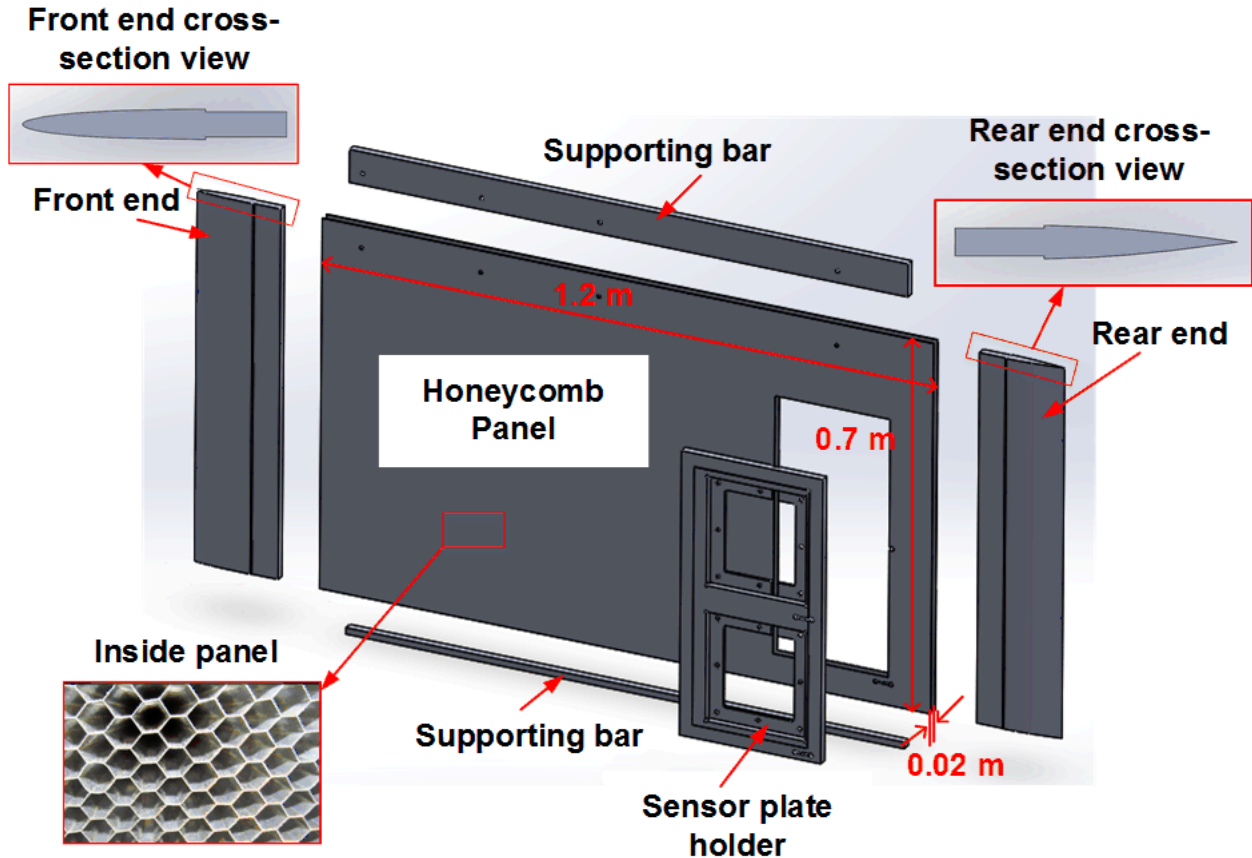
Design of the honeycomb towing plate for towing tank test.
